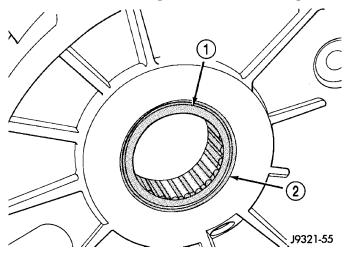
Output Shaft Rear Bearing Installation Depth 1 - BEARING (SEATED) AT LOWER EDGE OF CHAMFER 2 - CHAMFER
